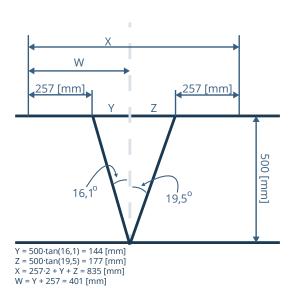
Dimensions of the opening of the bunker and the location of the center of the pusher.
